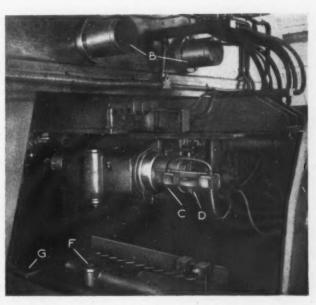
The driving pinion hubs are fine-bored in line, the outer end is faced, and the larger bore is chamfered by tools in this spindle head, which moved into position after the platen has been double-indexed to provide clearance
